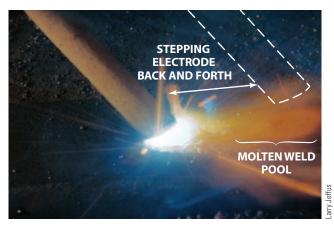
The electrode is moved slightly forward and then returned to the weld pool.
